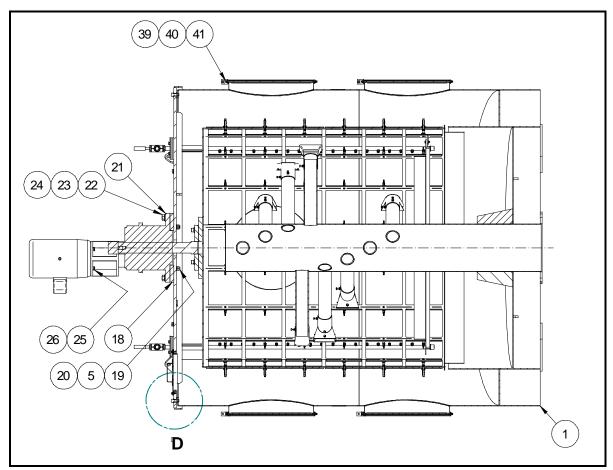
Final Assembly, Section B-B, WWF60-6L (Per Figure 4-14)
